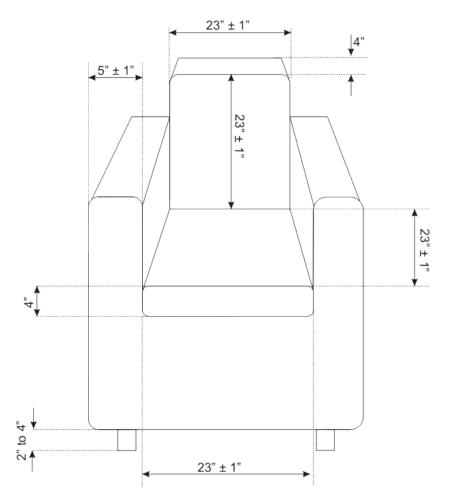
Typical Dimensions of Upholstered Chair Specimens.
